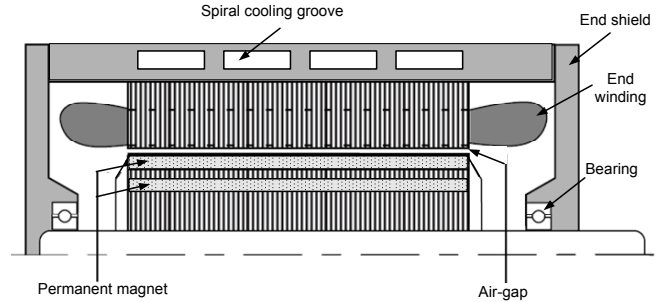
The longitudinal sectional view of the IPM machine showing the mechanical layout.
